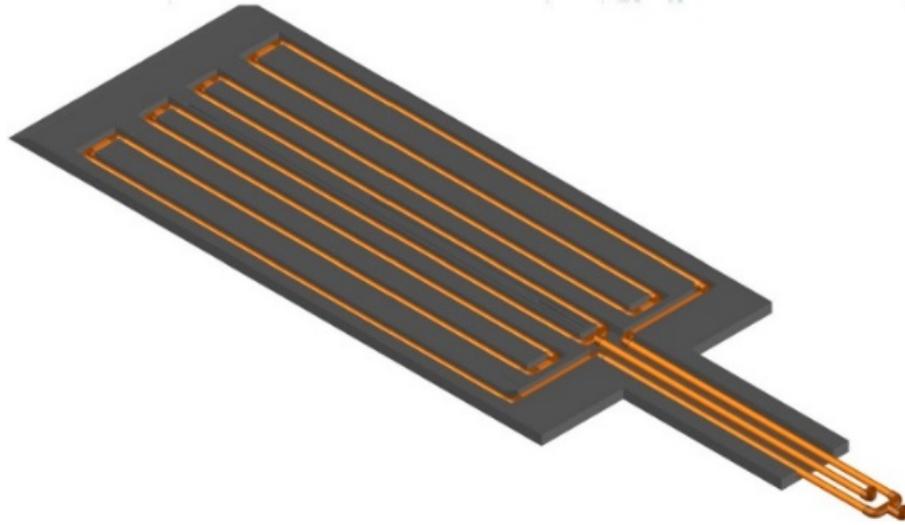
Cooling pad base and cooling water pipes. The dimension of the cooling pad is 1.2×0.6 m.
